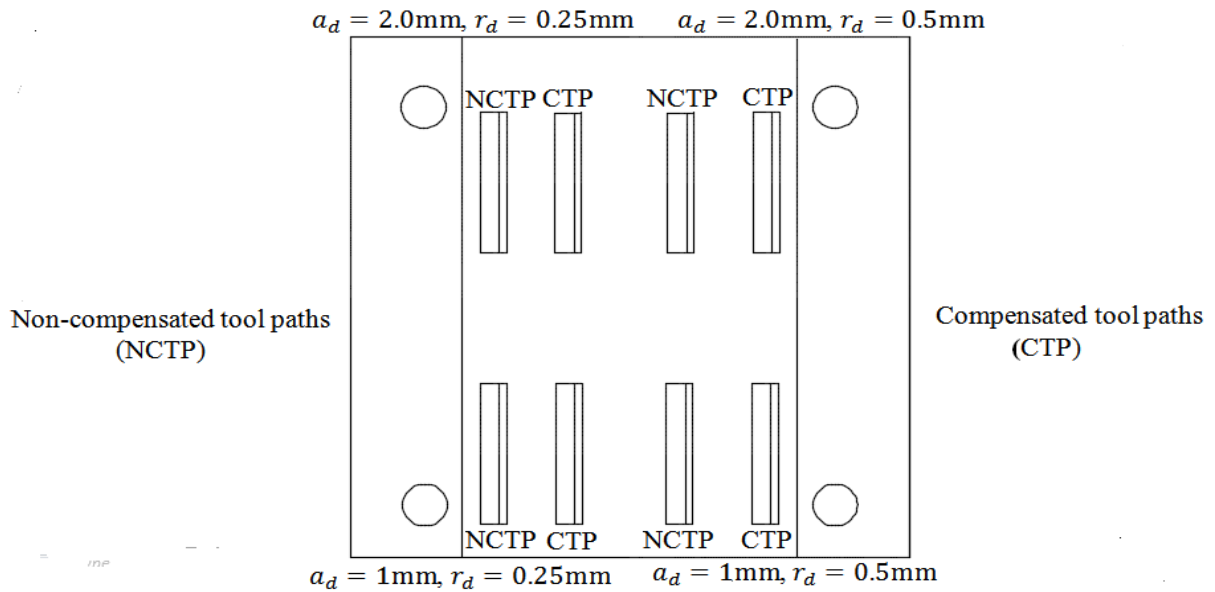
Experimental drawing of machined workpiece showing various values of axial and radial depth of cuts.
